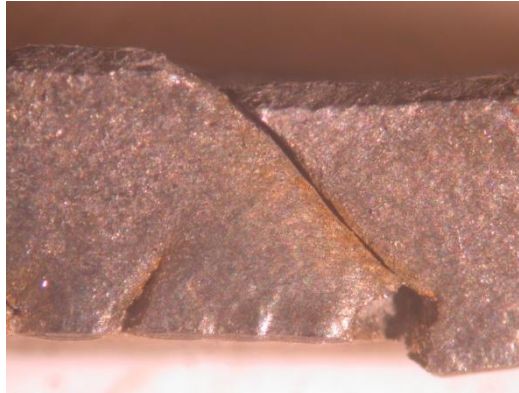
Fracture surface of recovered ES-1 ring
